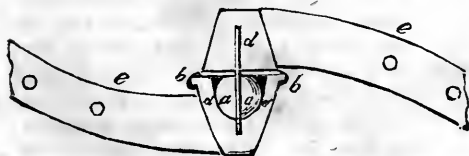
is a section of a brass cup or joint, in which is formed a hemispherical socket, in working order. The following is a description of its parts, viz:—*a a*, a spherical bearing, in the centre of which is a groove for oil; *b b*, the recess, which contains a
